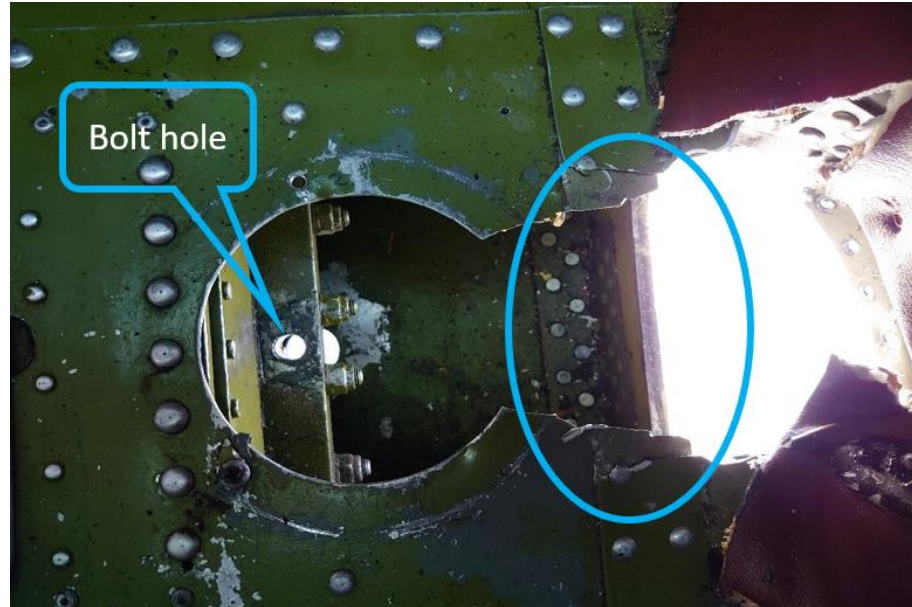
Damage to the fuselage in the area of the attachment of the right landing gear. The bolt hole for the inboard attachment and damage at the outboard attachment are indicated.
